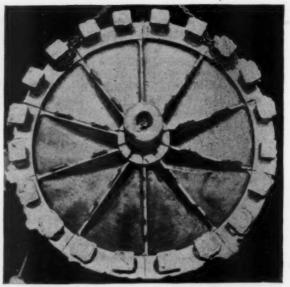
Molding methods employed for production of large spinning-chuck casting.
